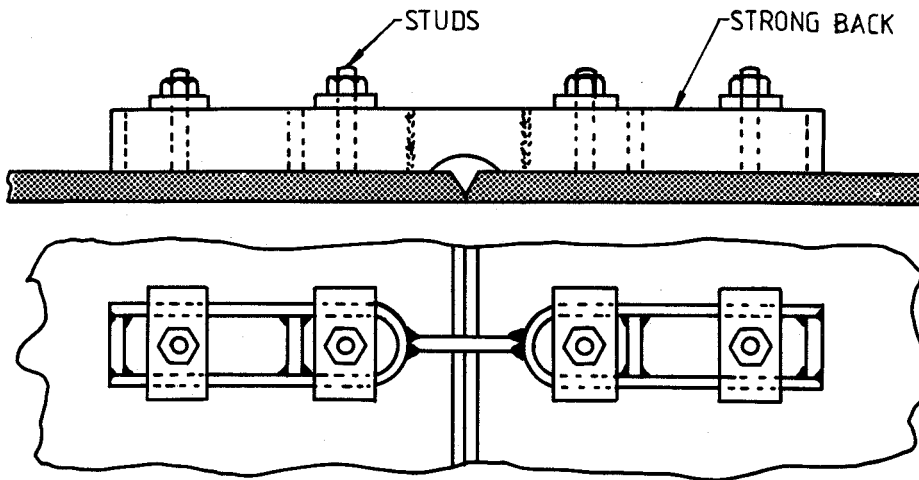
STUD WELDED STRONGBACK
